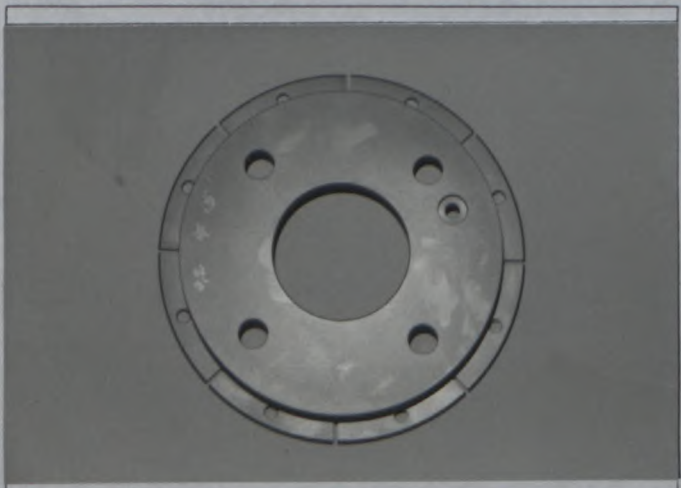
BRAKE BELL, FRONT AND REAR, TYPE B
